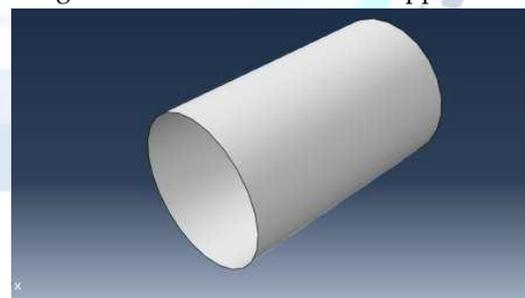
Crash Tube CAD model (Test no. 3)
